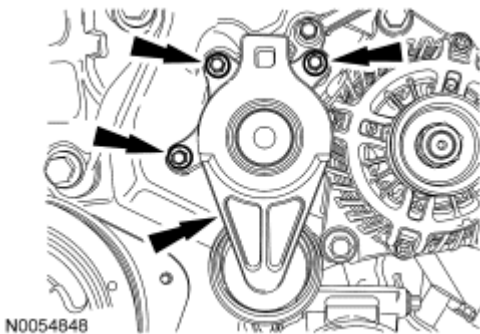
Locating Accessory Drive Belt Tensioner Bolts
